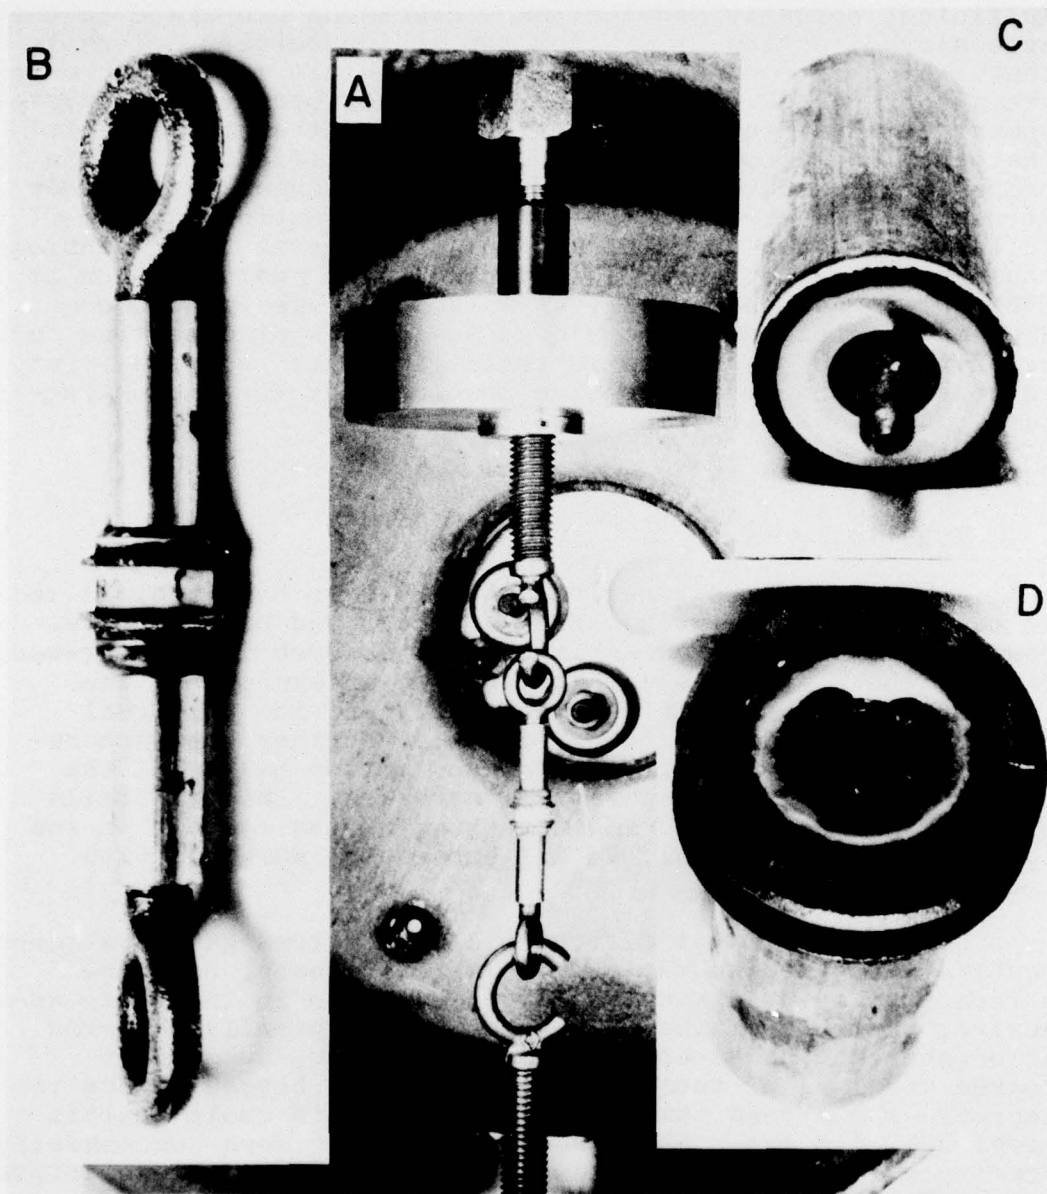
NRL tensile test of A-2 devices. (A) Device mounted in test machine. (B) Device bonded to brass attachments with threaded eye bolts. (C) and (D) Typical fracture halves of a G.E. device (No. 1567, tensile failure stress ~ 500 psi listed as a bad device).
